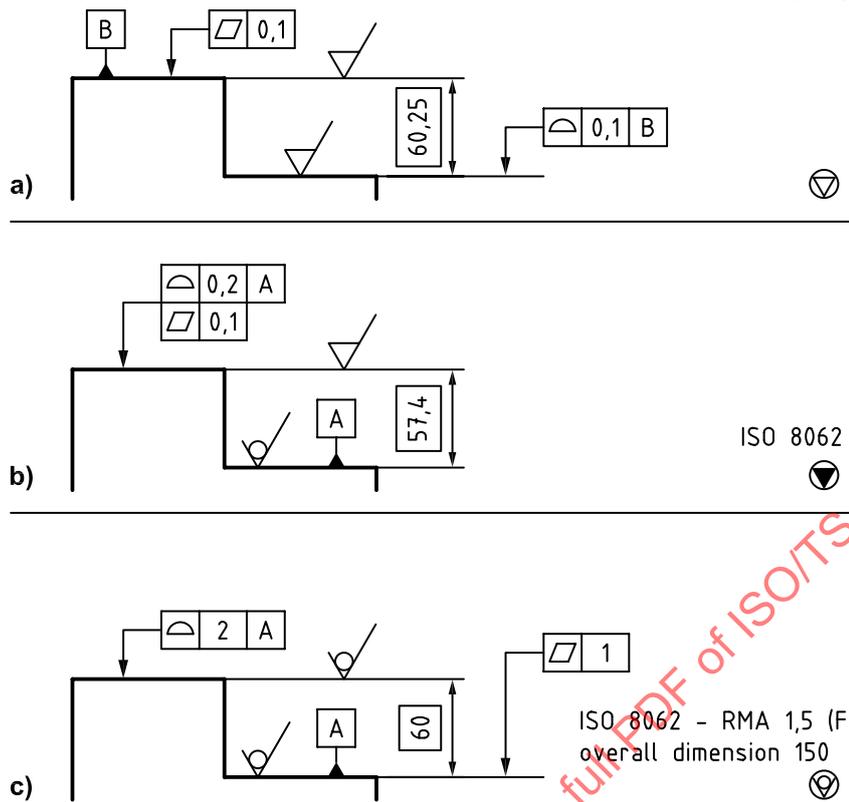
Plane relative to a plane datum (step dimension), requirements; a) final machined, b) intermediate machined, c) final moulded
